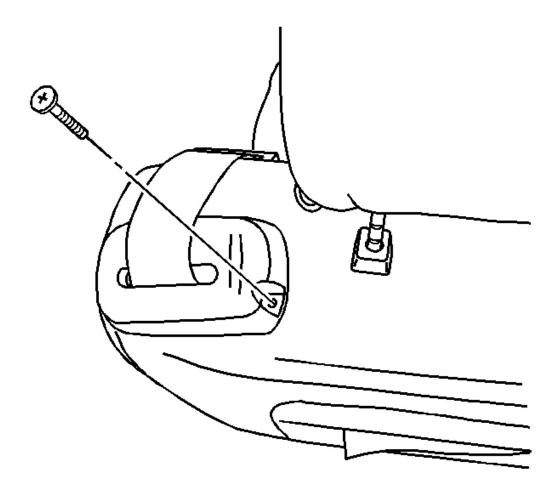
Identifying Seat Belt Bezel Retaining Screw Courtesy of GENERAL MOTORS CORP.
